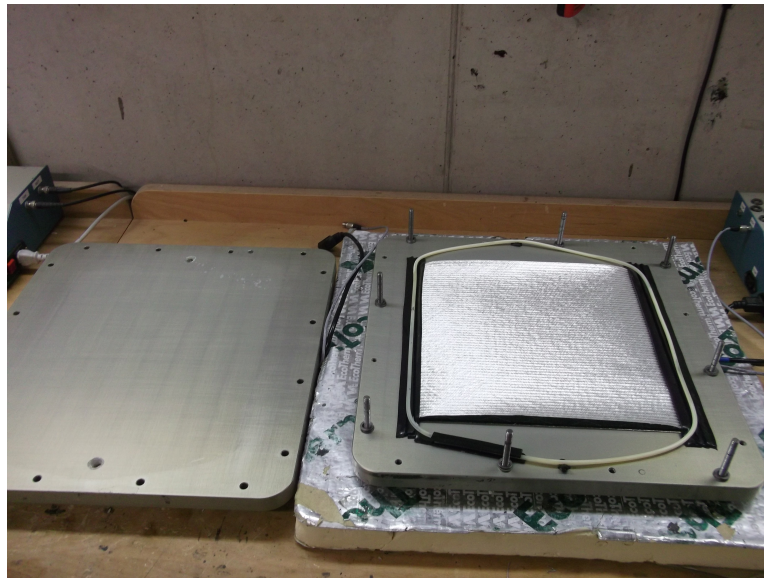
Mold ready to be closed. The fibers are placed, the rubber gasket seals the mold for vacuum and the spacer rings determine the final thickness of the laminate (WMC)
